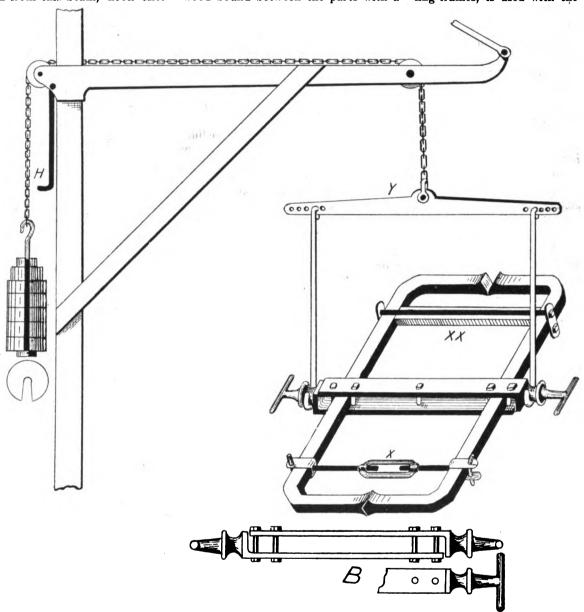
APPARATUS FOR HANDLING HEAVY FRAMES AND FORGINGS.
